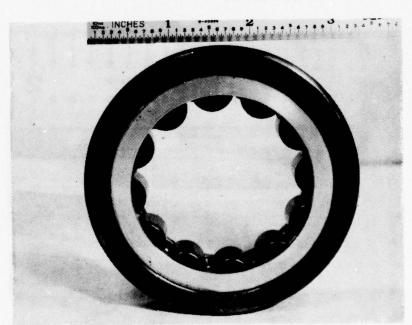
Main input pinion roller bearing after 25-minute loss-of-lube test of optimized transmission configuration number 1.
